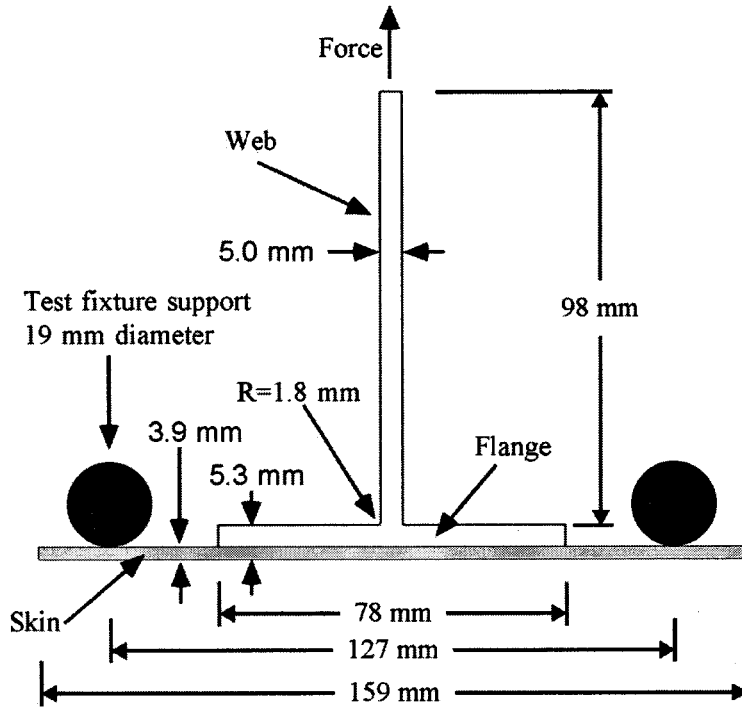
Loading and Approximate Dimensions for Skin-Stiffener T-Specimens.
